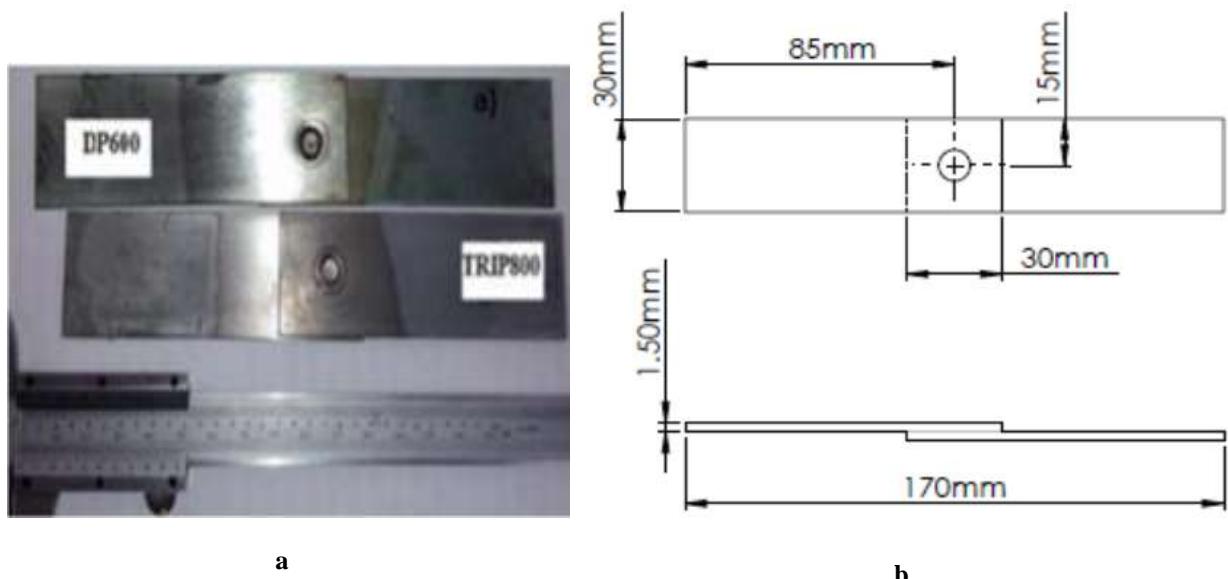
a. The joined tensile shear. b. The dimension of the tensile shear test sample.
